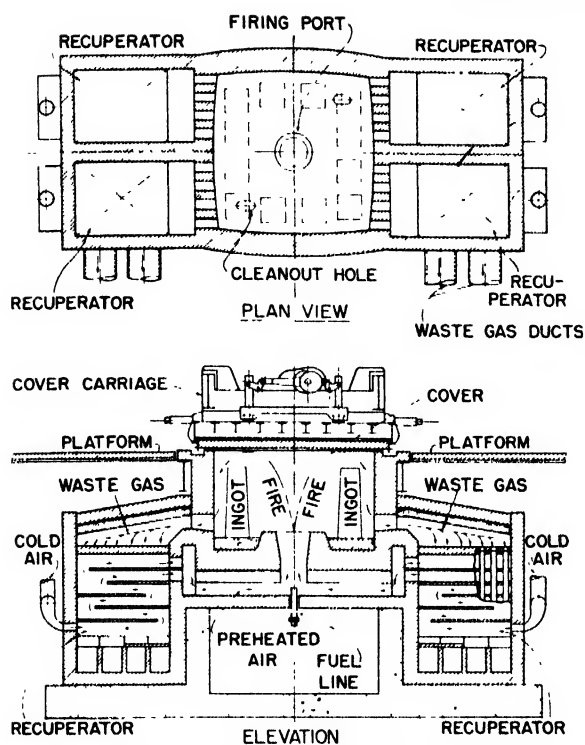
Schematic elevation and plan view of a "vertically-fired" soaking pit, with the burner opening in the center of the pit bottom. (Courtesy, Amsler-Morton Company.)
